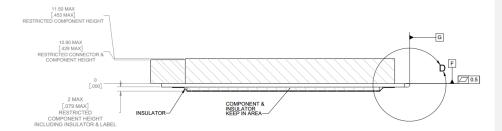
</u>26: Large Form Factor Keep Out Zone – Bottom View
